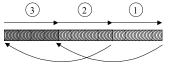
c. Welding sequence for cracks with length less than 300 mm
